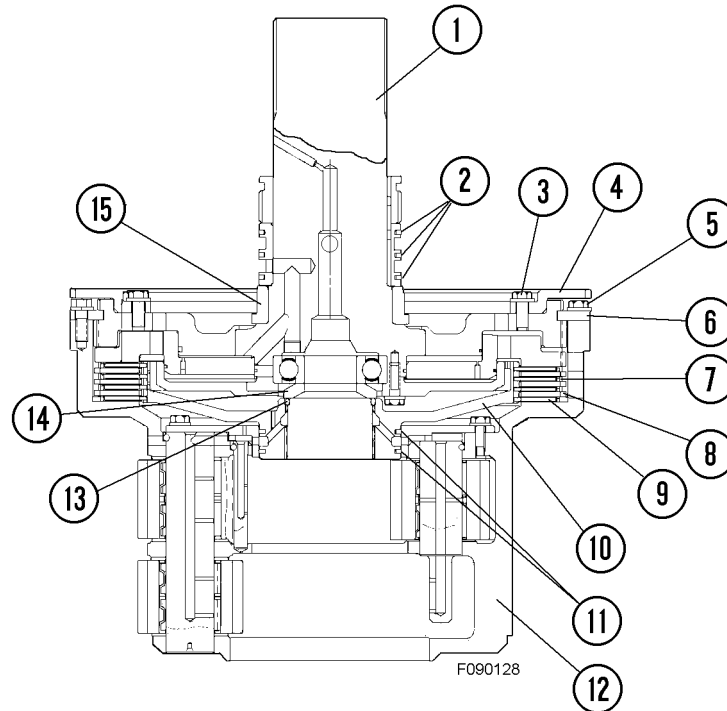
NUMBER SEVEN CLUTCH ASSEMBLY
